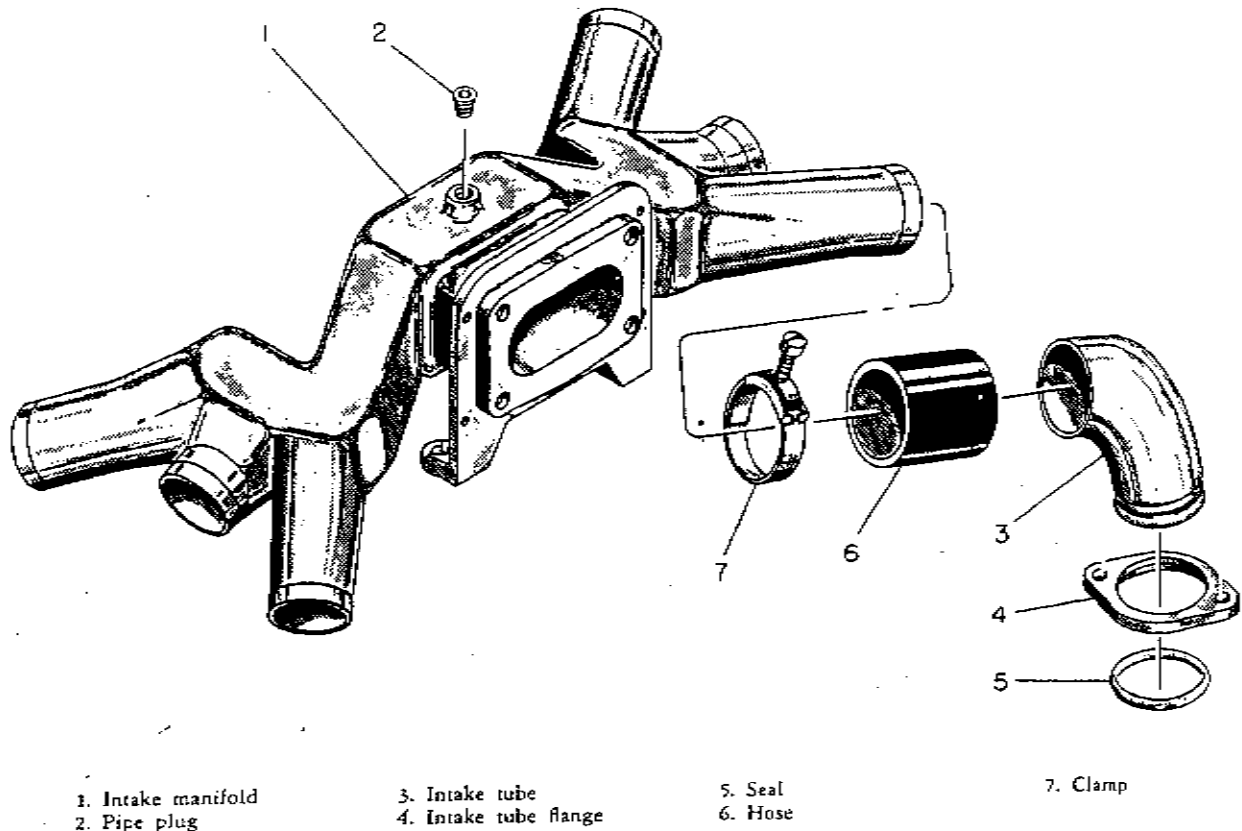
Three-Quarter Left Rear View of Exploded Intake Manifold and Tubes Assembly
